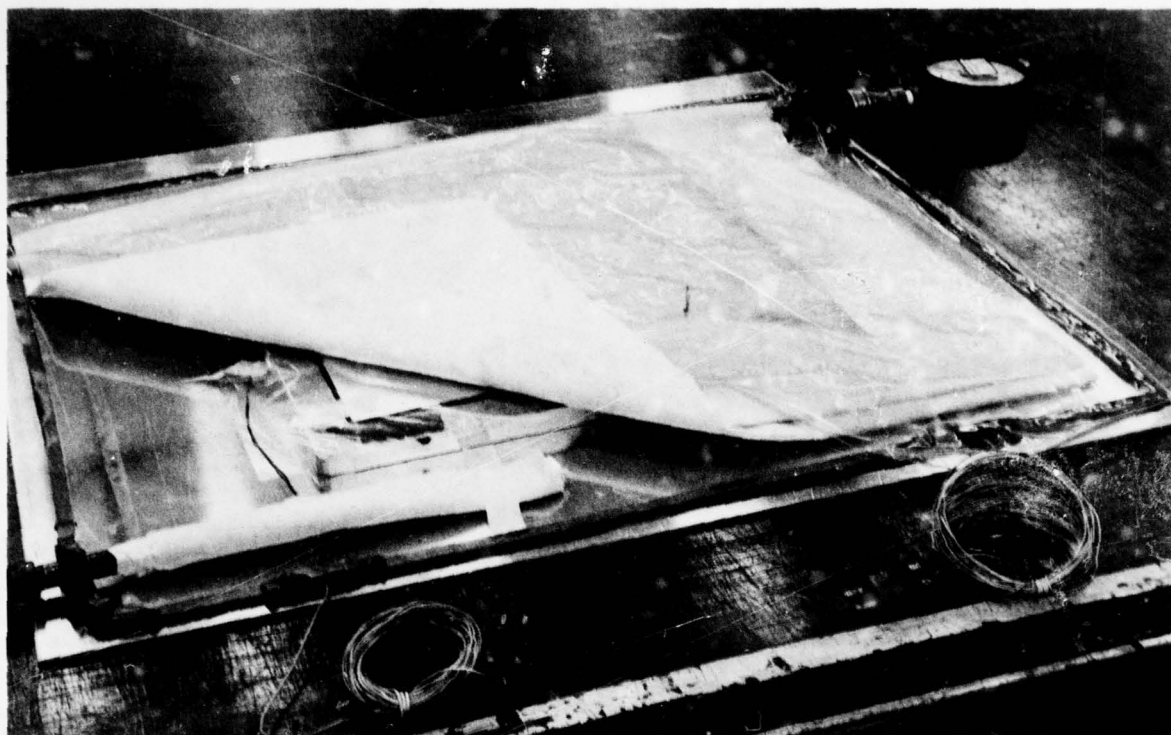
Bayonet-Type Vacuum Probe Used in Bond Assembly
